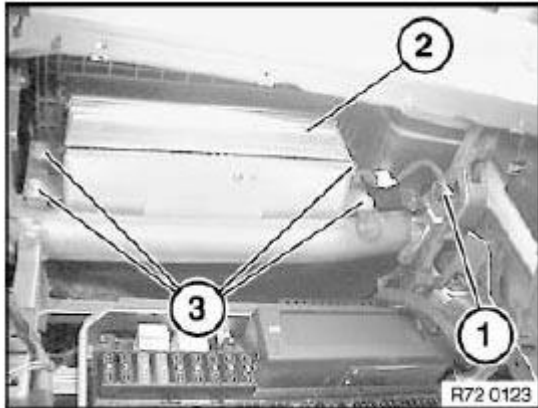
Identifying Plug Connection, Screws And Airbag Module
